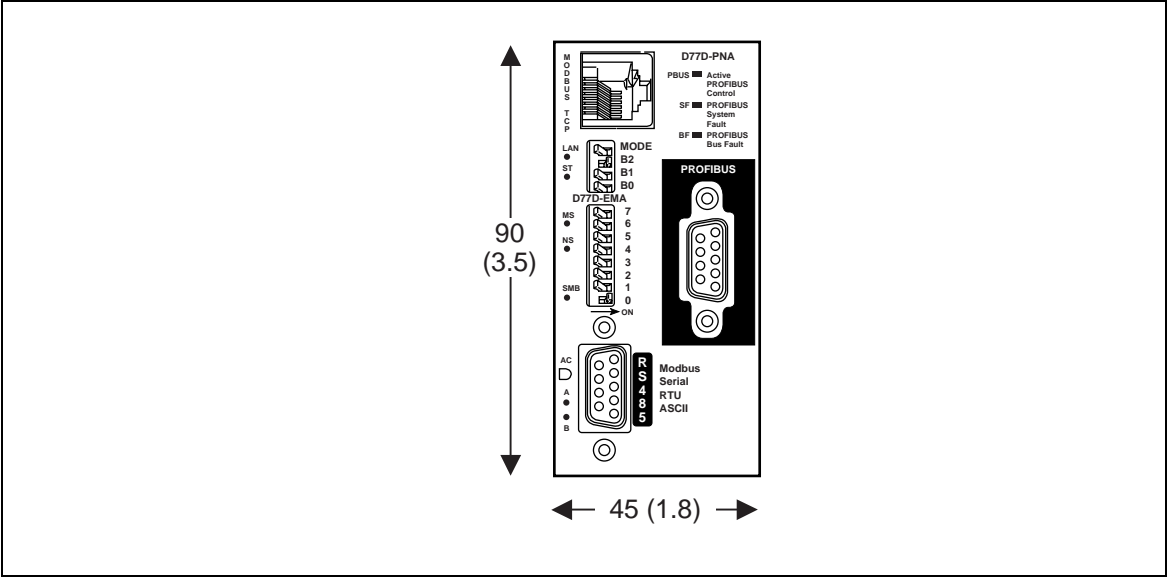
Profibus Adapter (D77D-PNA) Dimensions, mm [in]
